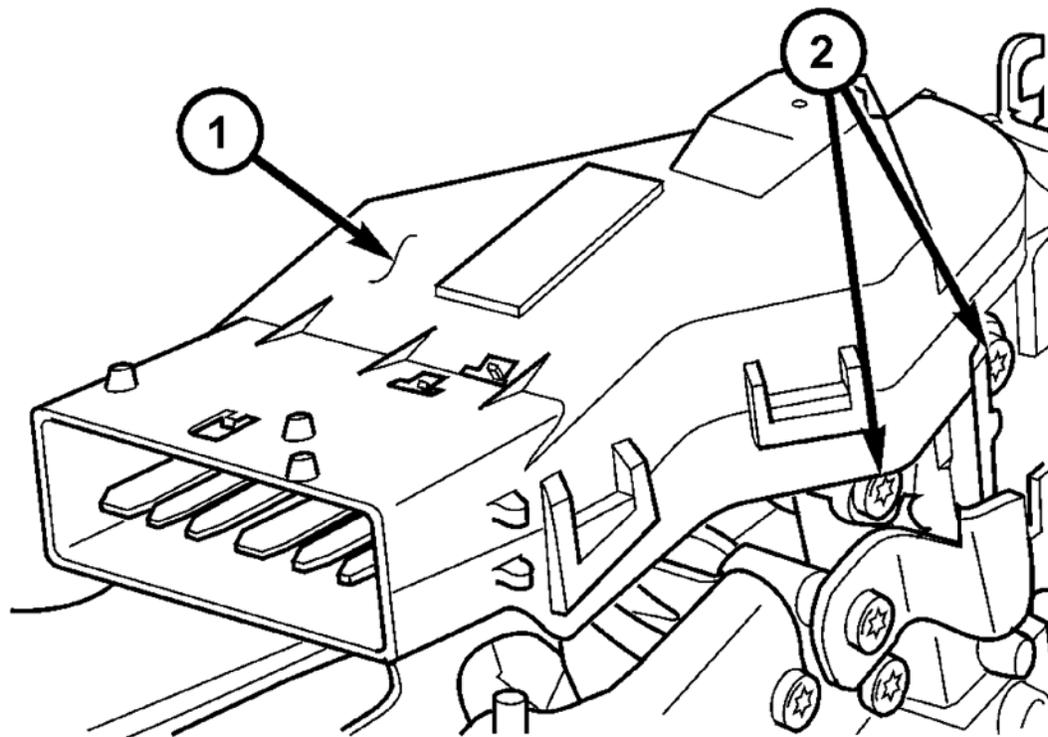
Ignition Switch Mounting Screws & Non-Tilt Mounting Bracket Screws
